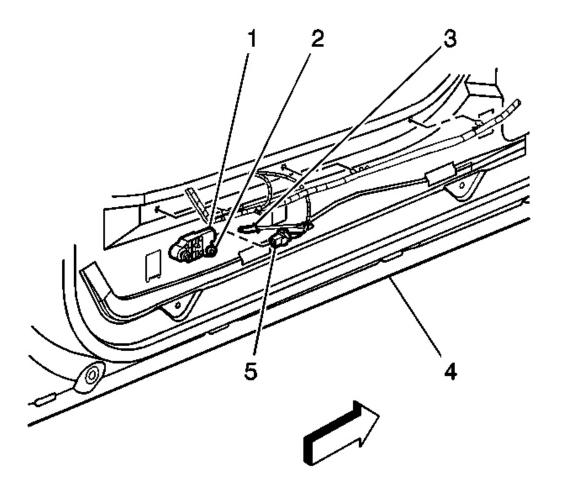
View Of Connector Position Assurance (CPA) & Side Impact Sensor Yellow 2-Way Connector Courtesy of GENERAL MOTORS CORP.
